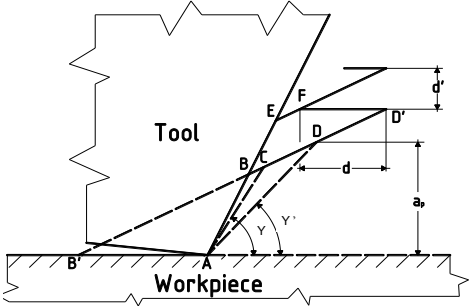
A supposed mechanism of chip formation in hard turning [3]
